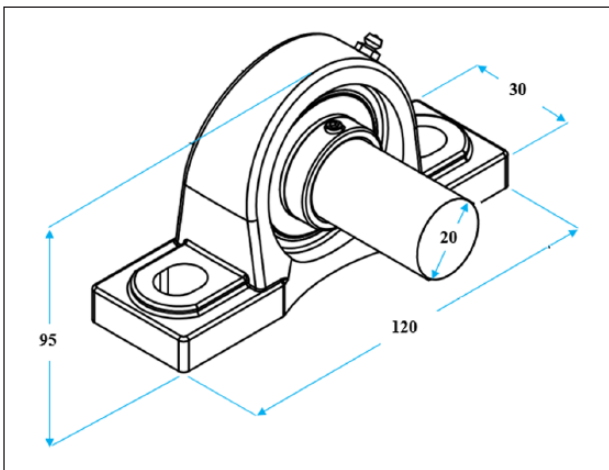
Basic dimensions of the housing structure (dimensions in mm).
